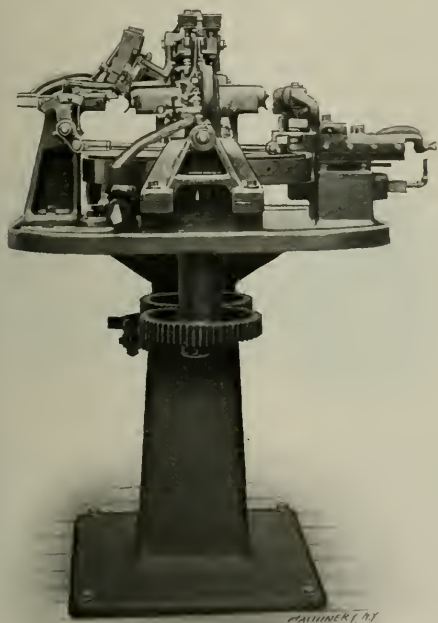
Needle-making Machine, showing Numbering and Lettering Head in Front.
